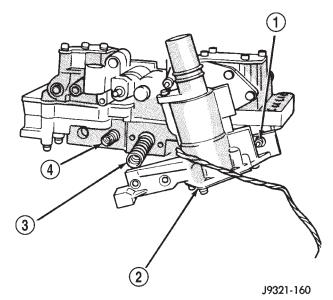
Converter Clutch And 3-4 Shift Valve Springs
